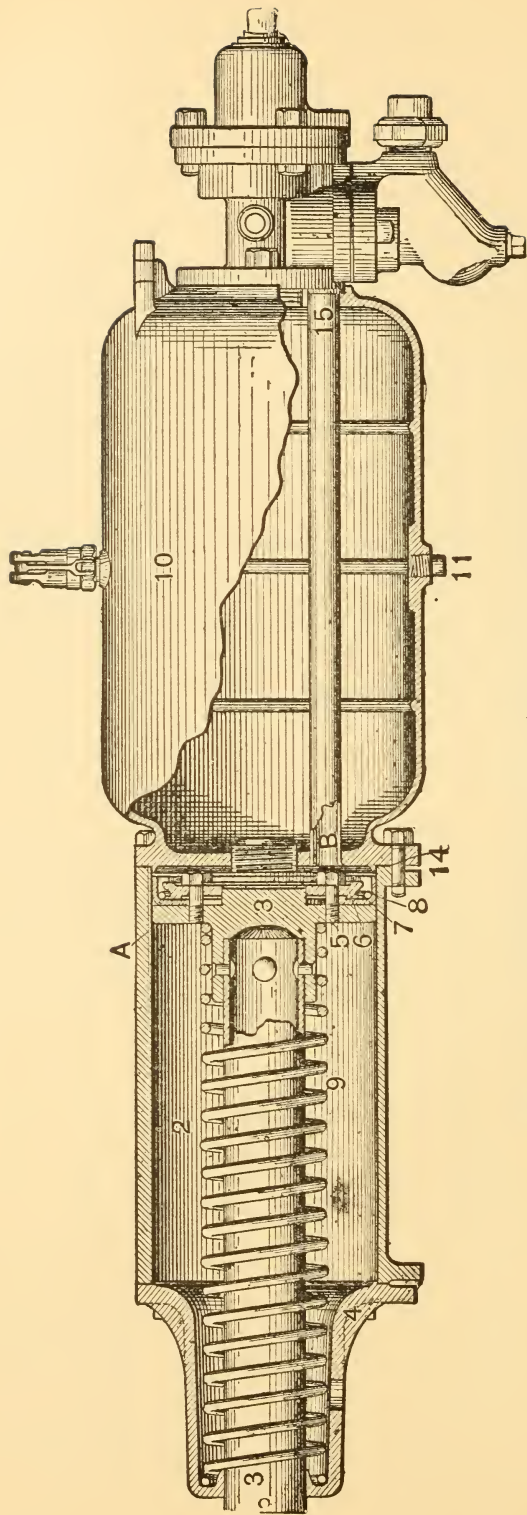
WESTINGHOUSE FREIGHT EQUIPMENT.
